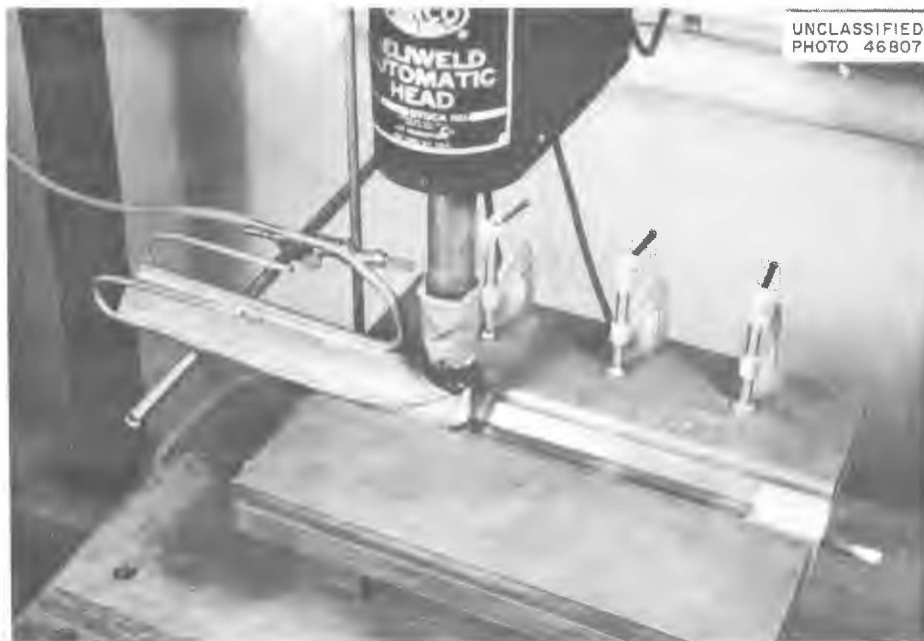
Closeup View of Welding Torch and Trailer Shield in Position Over Weld Sample.
